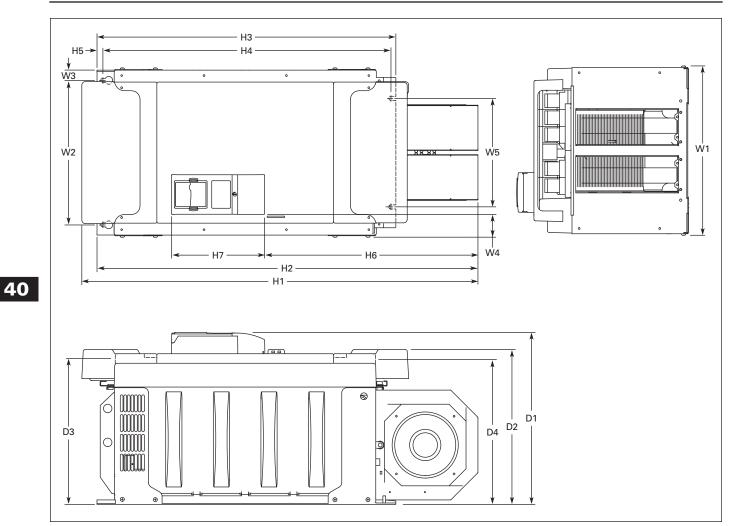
HVX9000 Dimensions, FR10 Open Chassis
